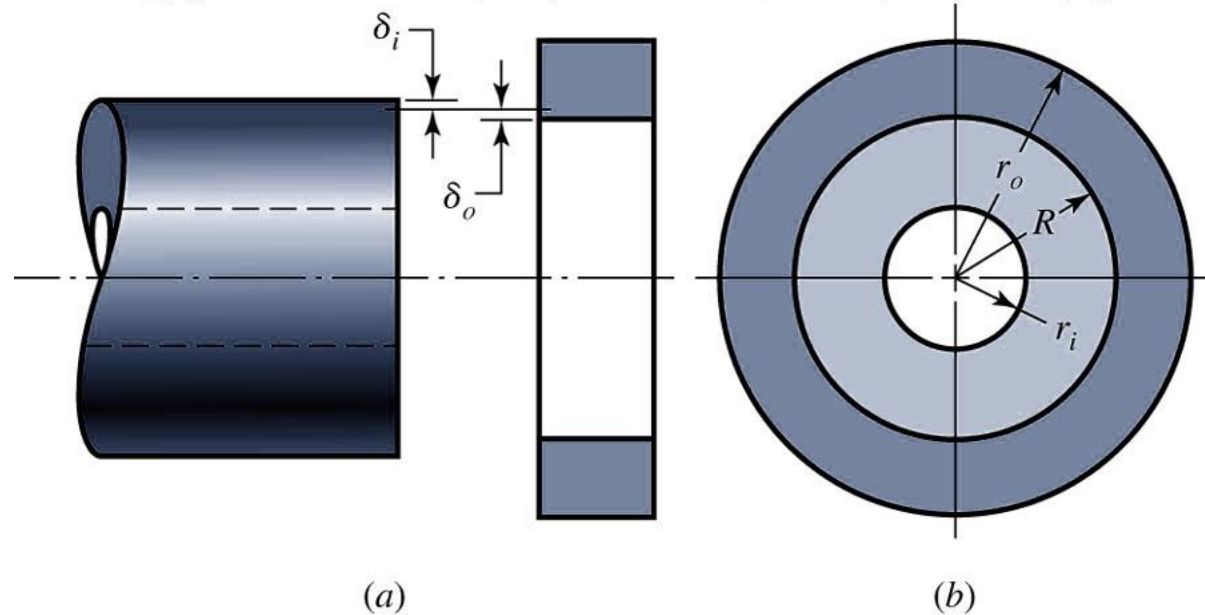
Notation for press and shrink fits. (a) Unassembled parts. (b) after assembly.
